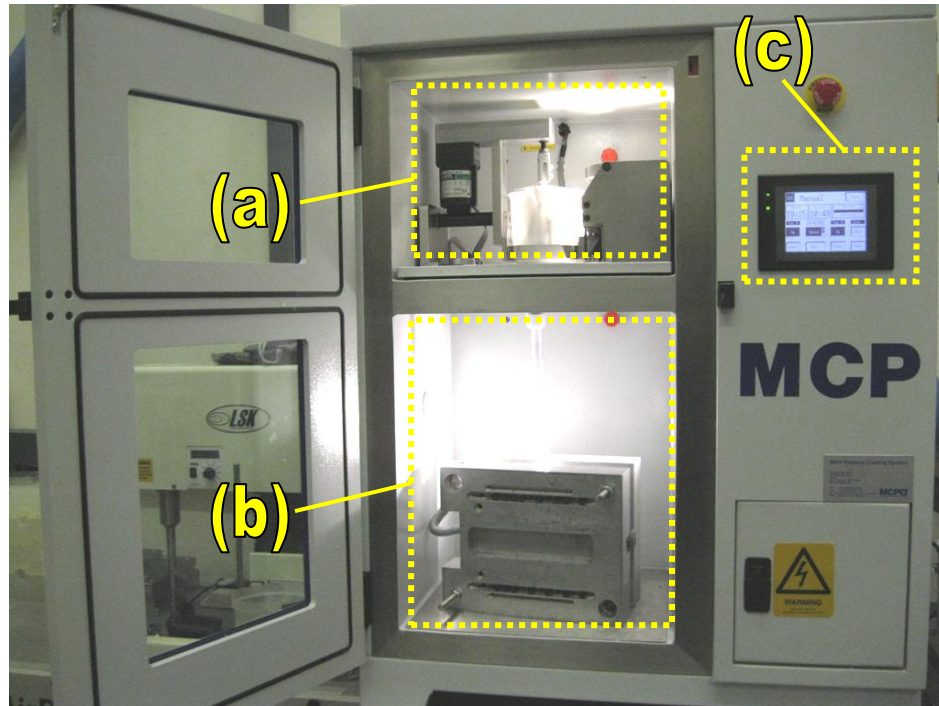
The vacuum casting machine: the top mixing chamber (a), the lower injection chamber (b), control touch panel (c).
